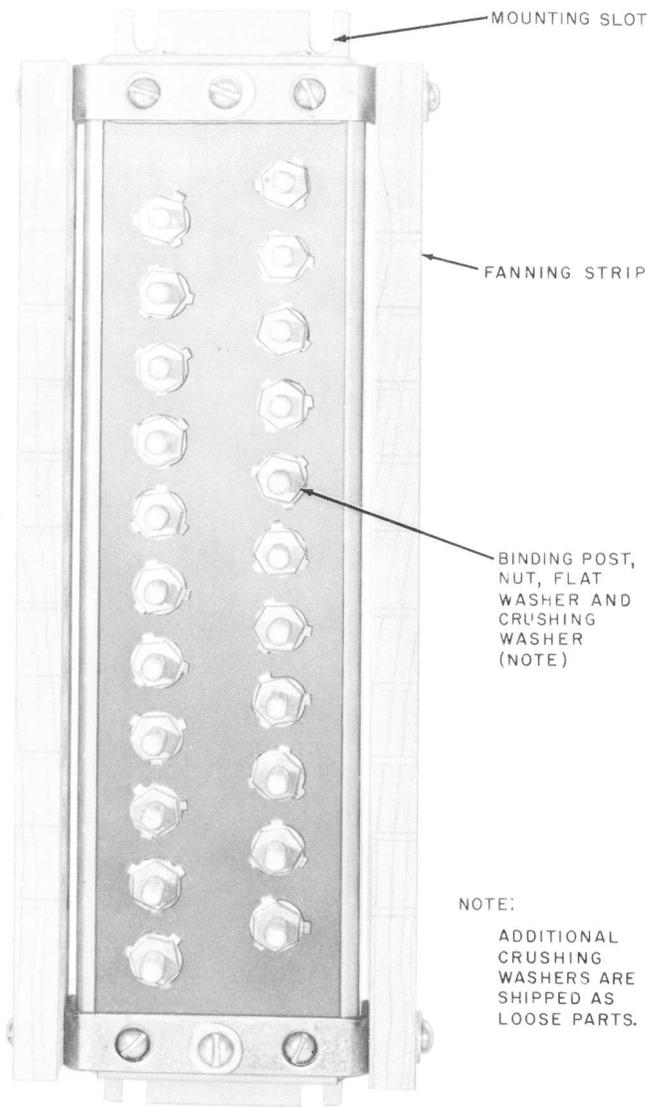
57A2A-16 and 57B1A-10 Connecting Blocks
